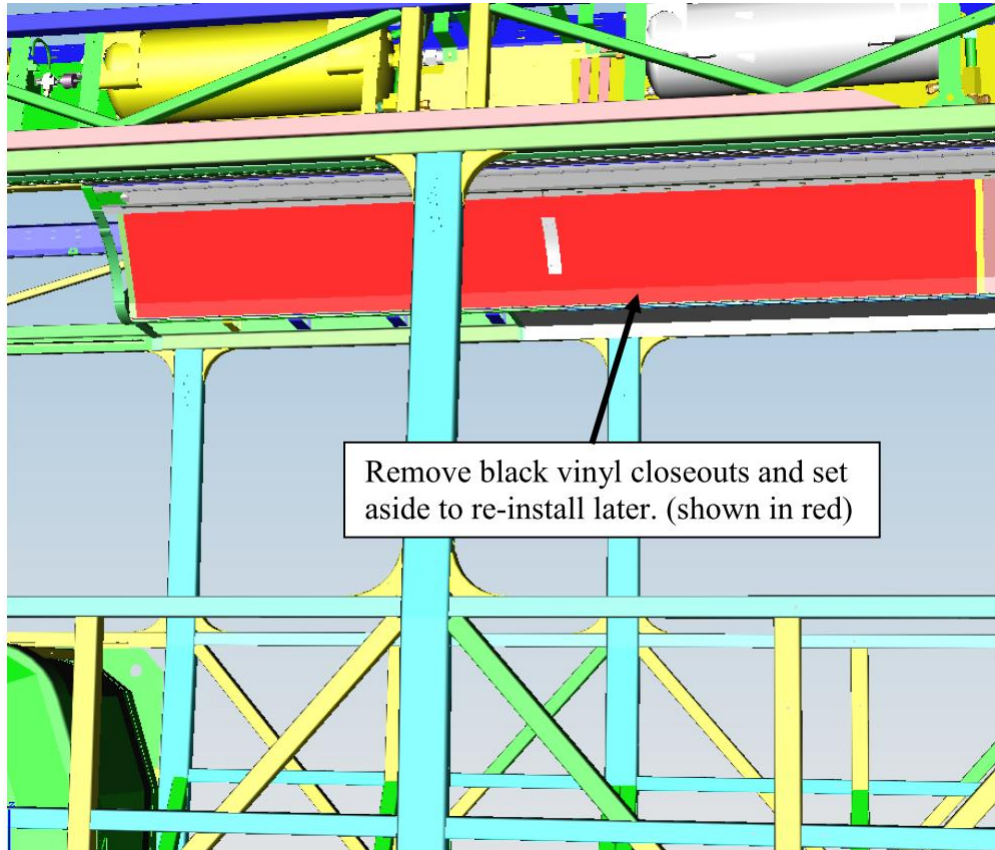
REMOVE BLACK VINYL CLOSEOUTS TO GAIN ACCESS
